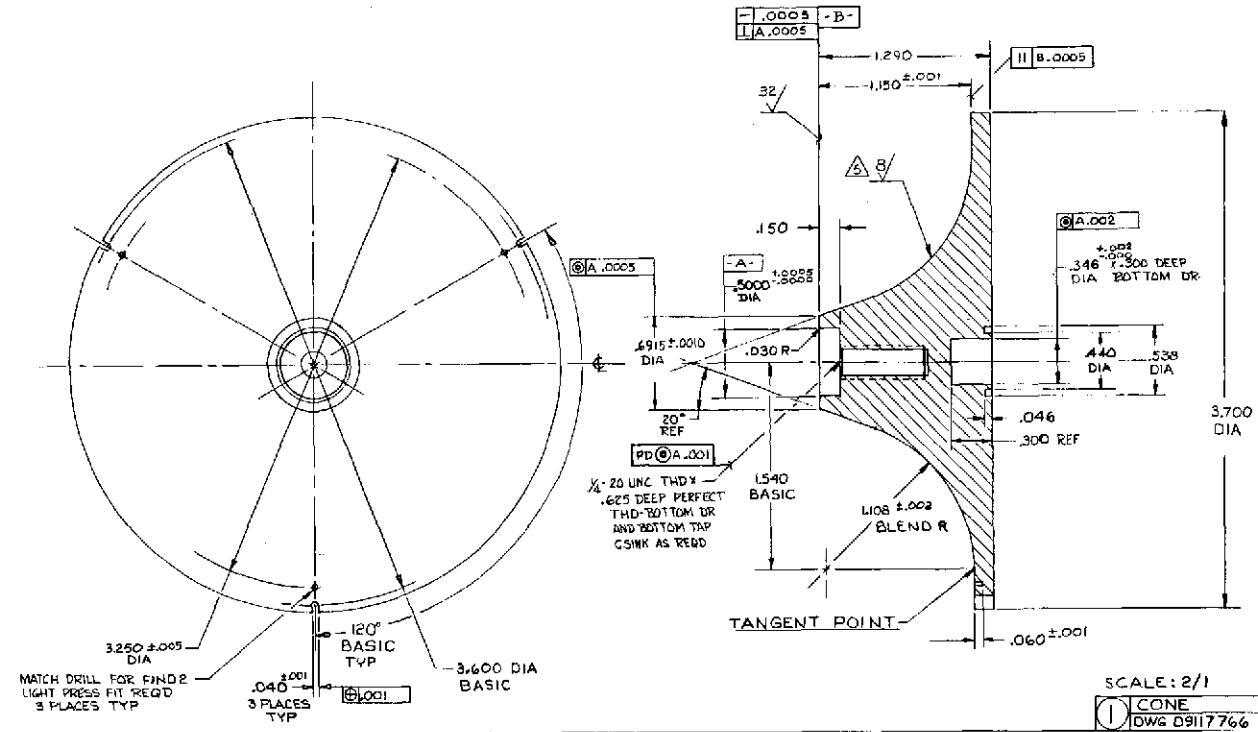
Assembly, cone and support, separator - 100-kW erosion loop
